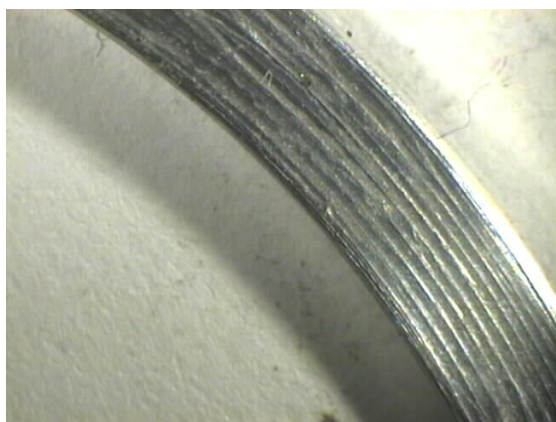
Washer Manufacture from Drilled + Reamed Aluminium Solid Bar.
